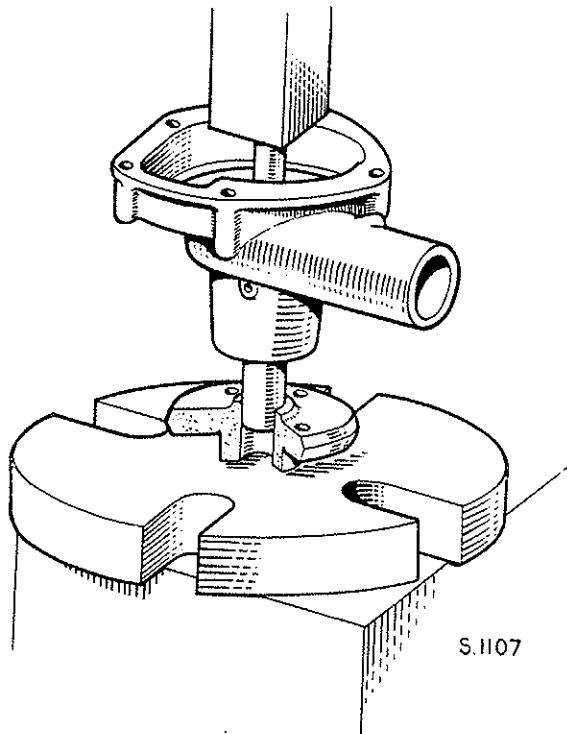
Pressing the fan pulley centre on the pump spindle
